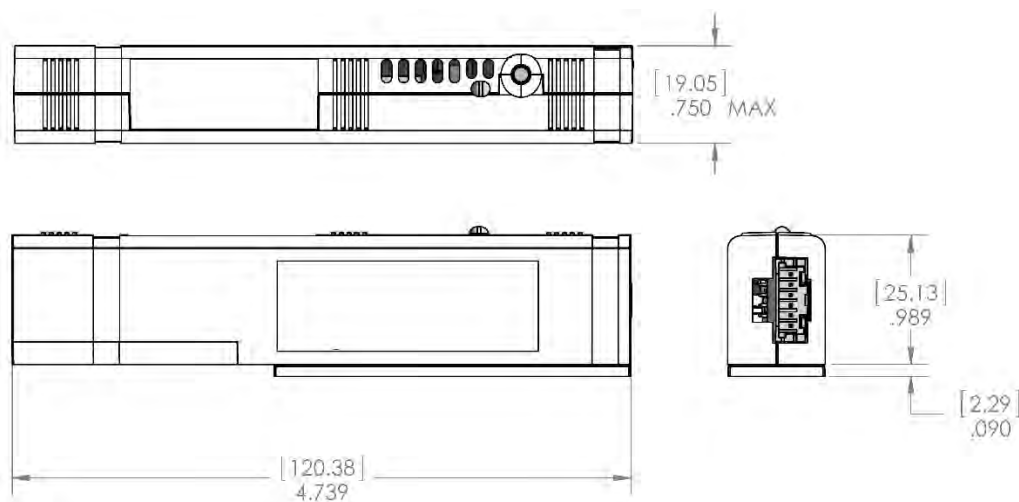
Mechanical Drawing - Wzzard Commercial Model | Units = [millimeters] inches
